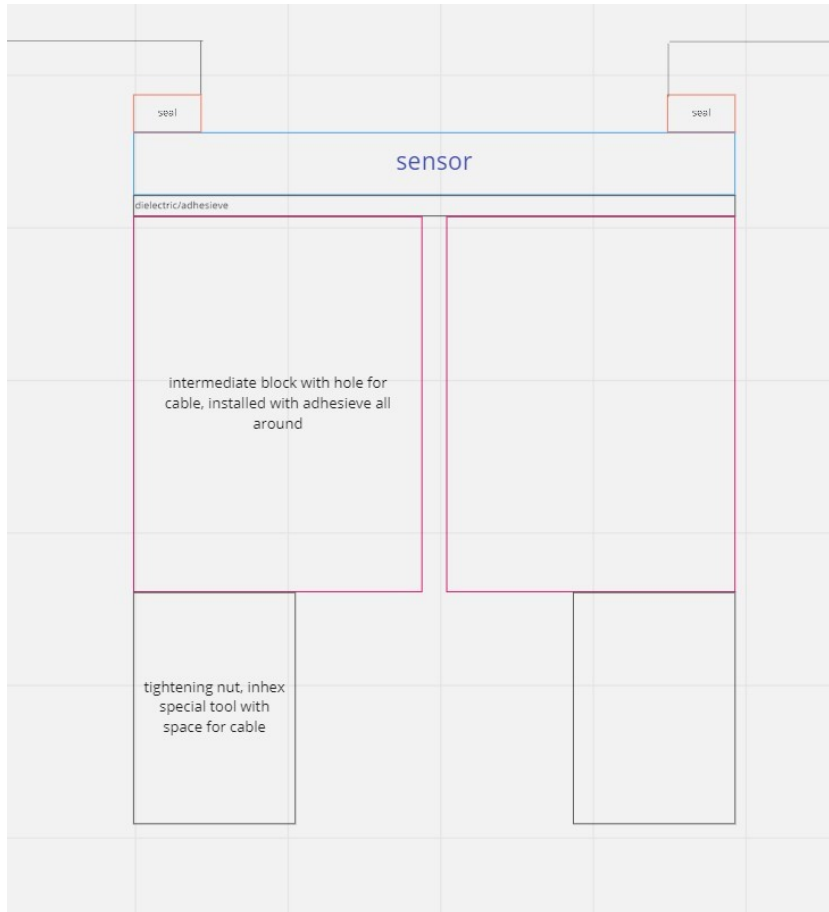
New design for sensor installation with robustness in mind. (Riiki, Sensor instrumentation improvements, 2021).
